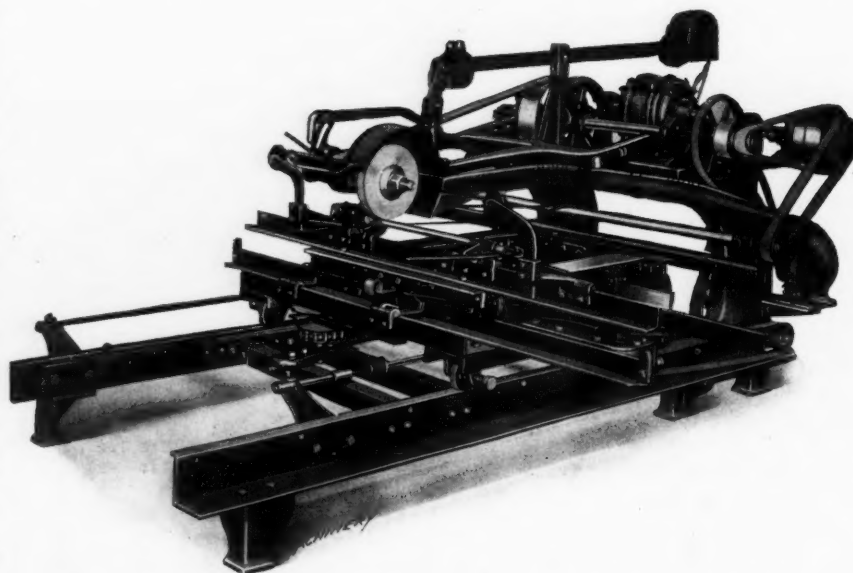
Excelsior Automatic Grinding and Polishing Machine equipped with Pipe Grinding Attachment
